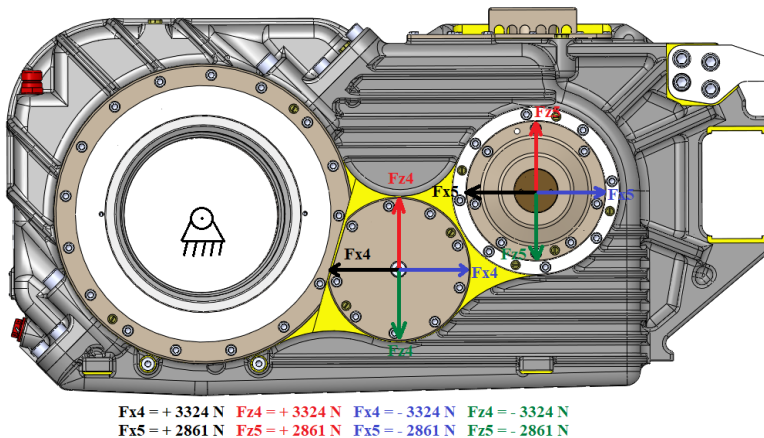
Inertial load of the shafts on the 2nd bearing.
